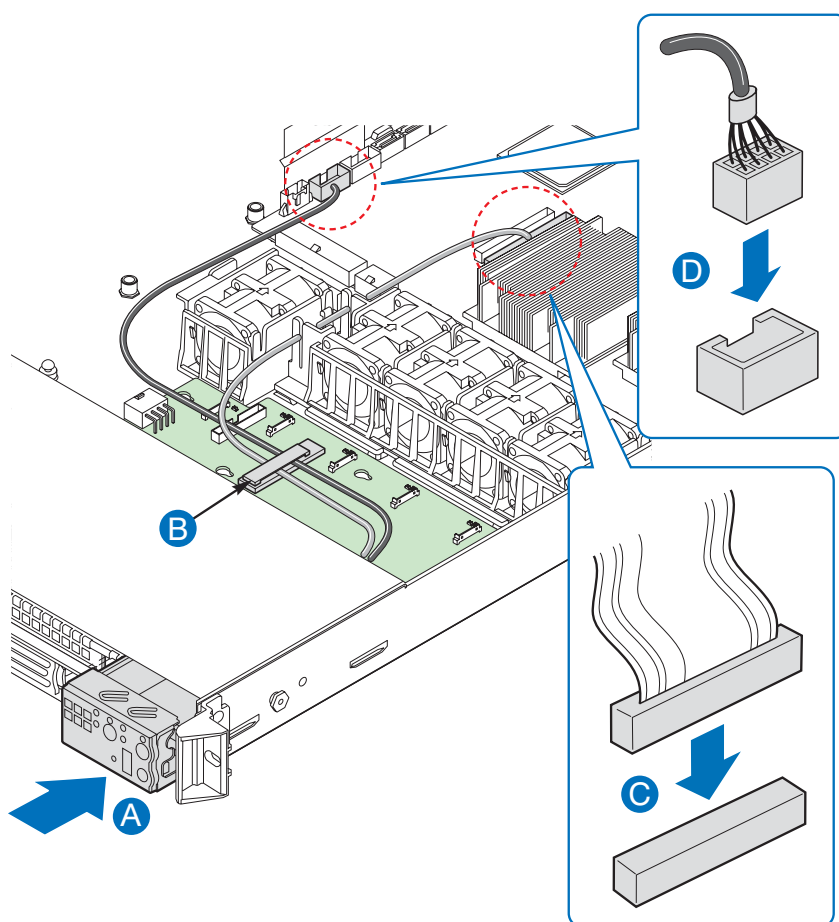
Removing the Control Panel Module (Fixed Drive System)
